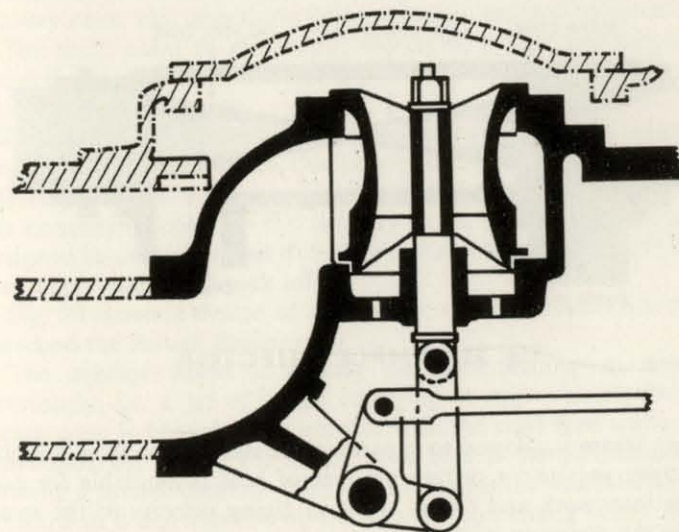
DOUBLE-BEAT-TYPE REGULATOR VALVE
